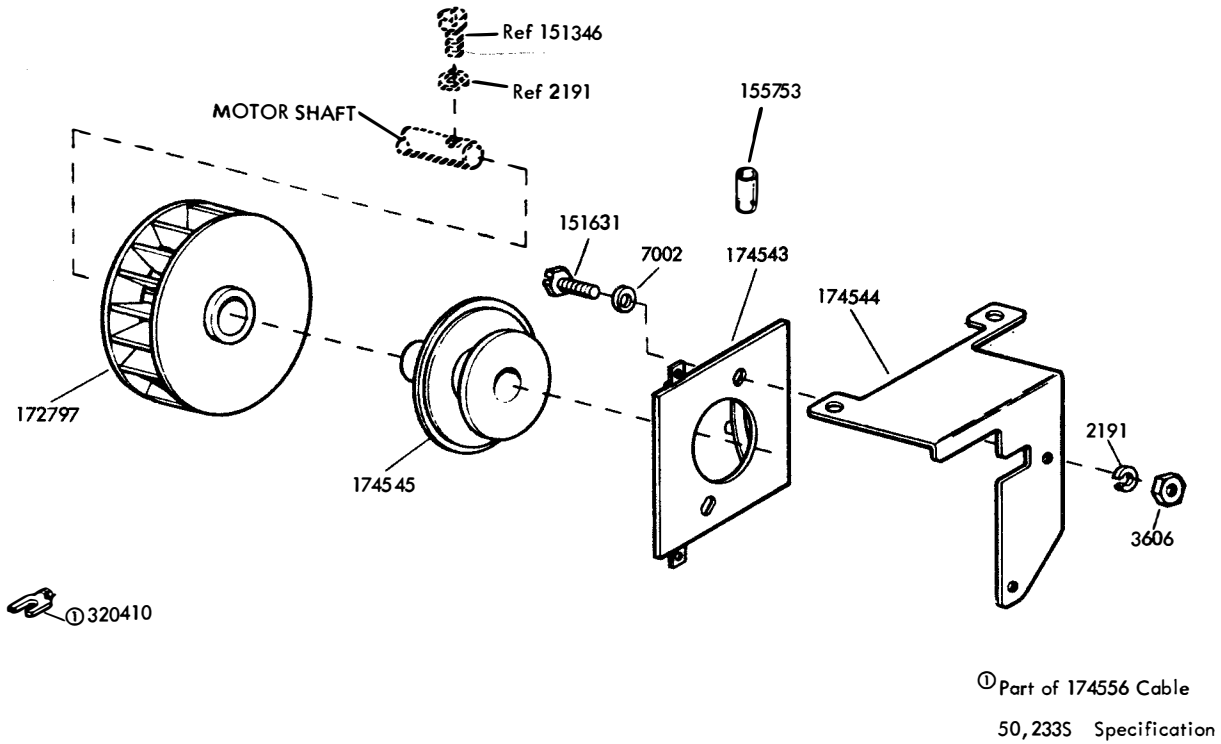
174546 MODIFICATION KIT TO PROVIDE MOTOR RUNNING CONTACTS
